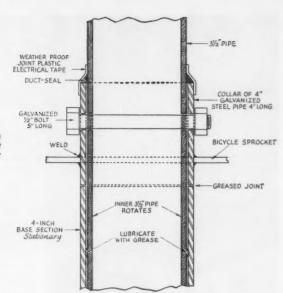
Details of the sleeve bearing at top of base section. The driving sprocket is welded to the galvanized iron collar which mates with the 4-inch base section to form a bearing.
